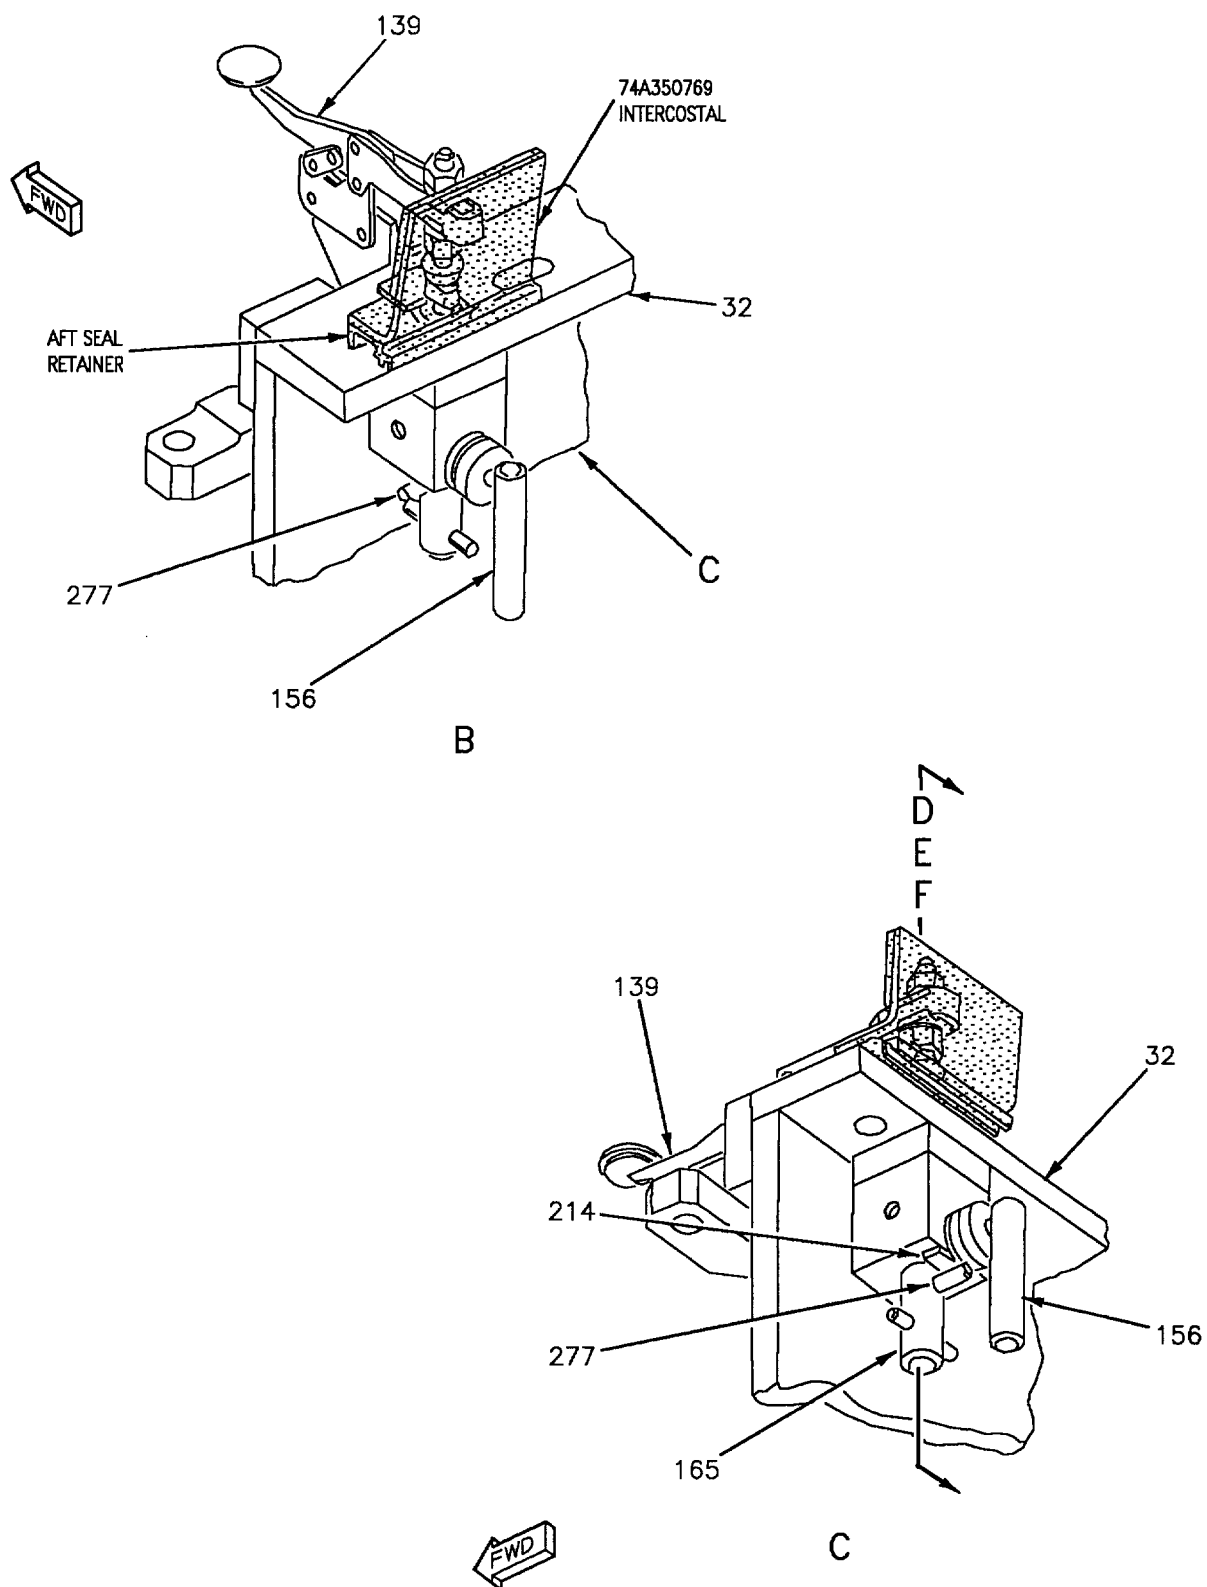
Inspection or Replacement - Aft Seal Retainer (Sheet 2)
